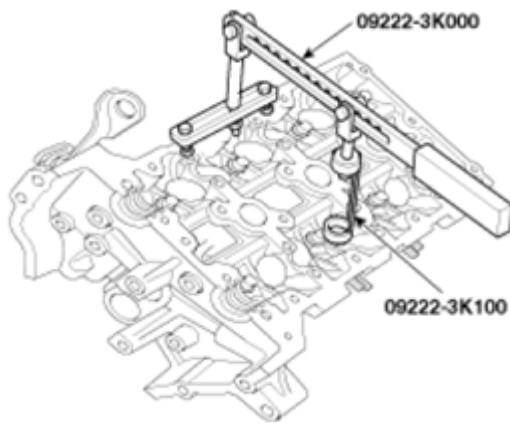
Removing Retainer Lock Using SST (09222-3K000, 09222-3K100)
